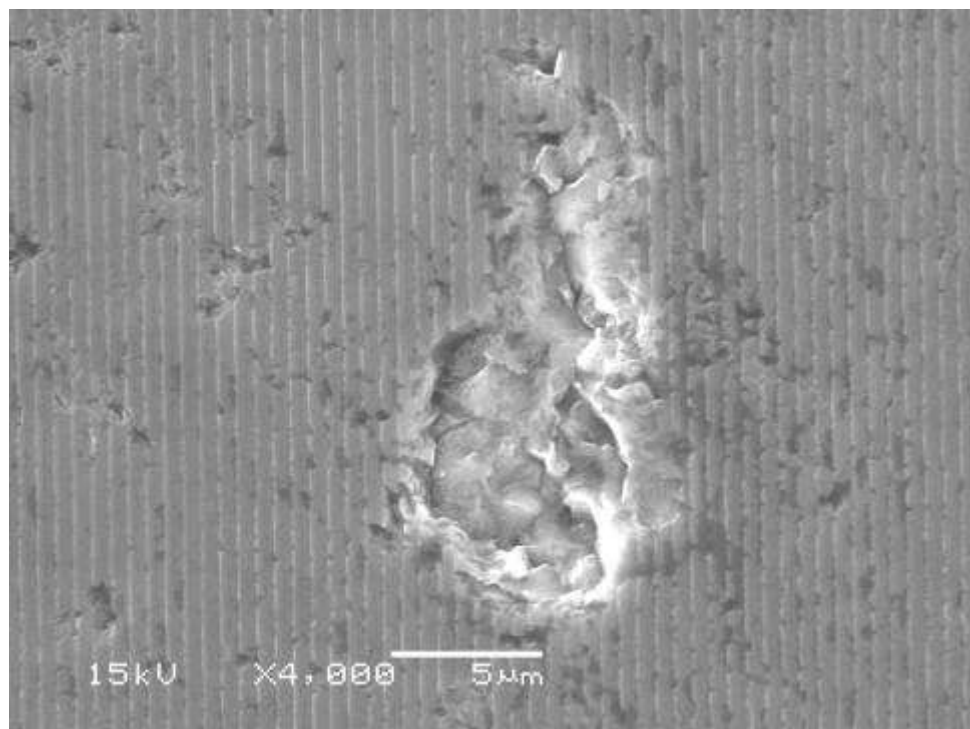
SEM image of finished surface using ultra precision cutting machine with ball screw slider
